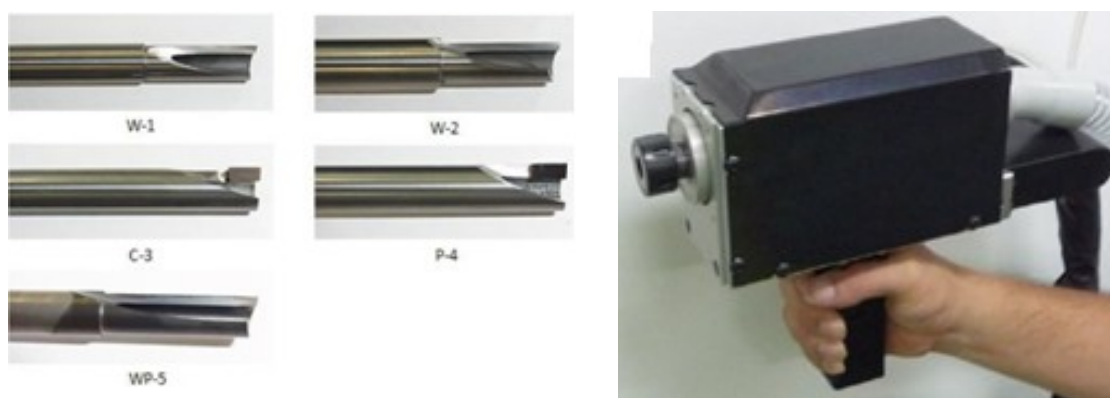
Examples of center vacuum drills and drill motor with vacuum system for CFRP[29]
